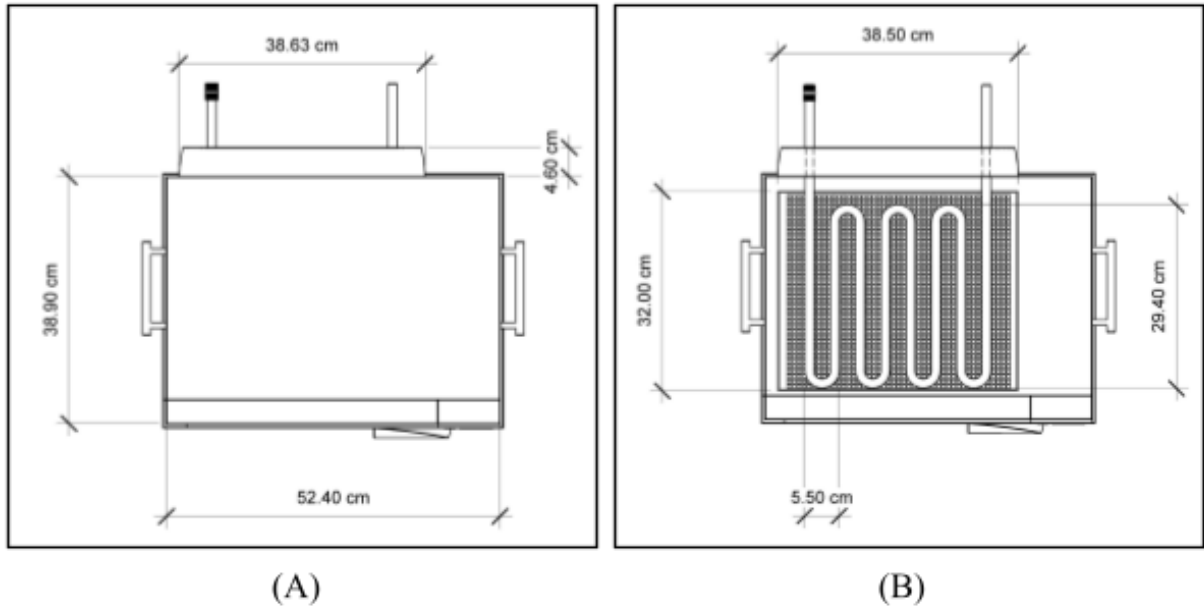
(A) Top view of the proposed coffee bean dryer, (B) Top view section of the proposed coffee bean dryer
